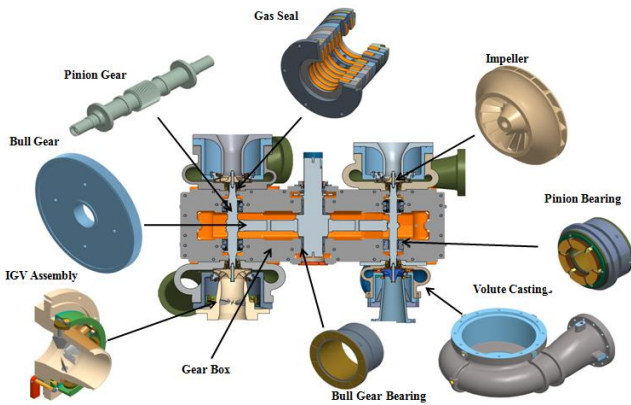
Primary Components of Core Section of Integrally Geared Compressor
